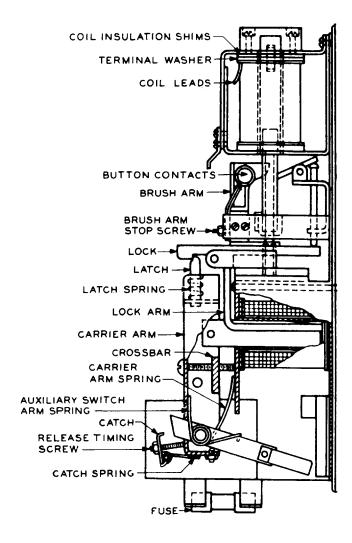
Undervoltage Device and Contactor Mechanism (Main Control Closed, Old Version)
